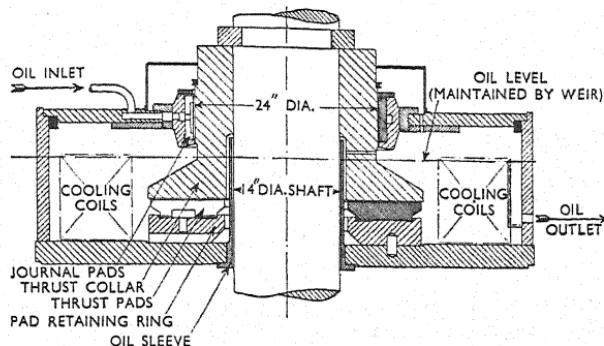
Vertical Pivoted-Pad Thrust Bearing
